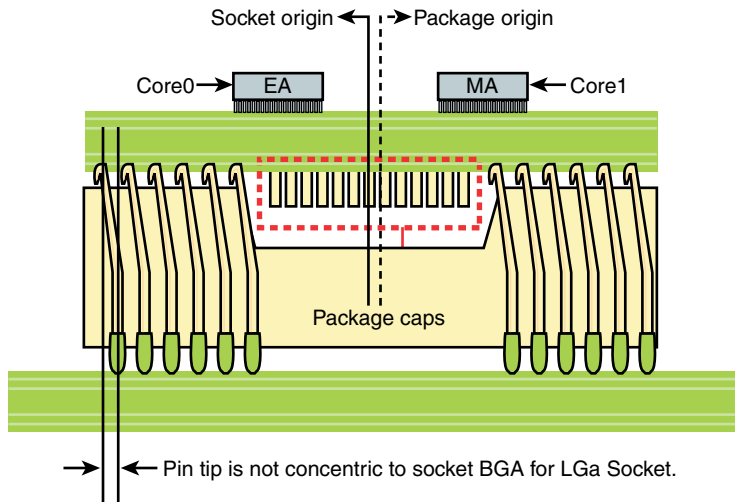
Cross-sectional view of core, package, socket, and PCB
